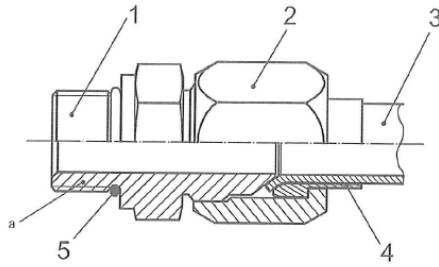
Cross-section of typical 24° cone connector with O-ring seal cone (DKO) end
